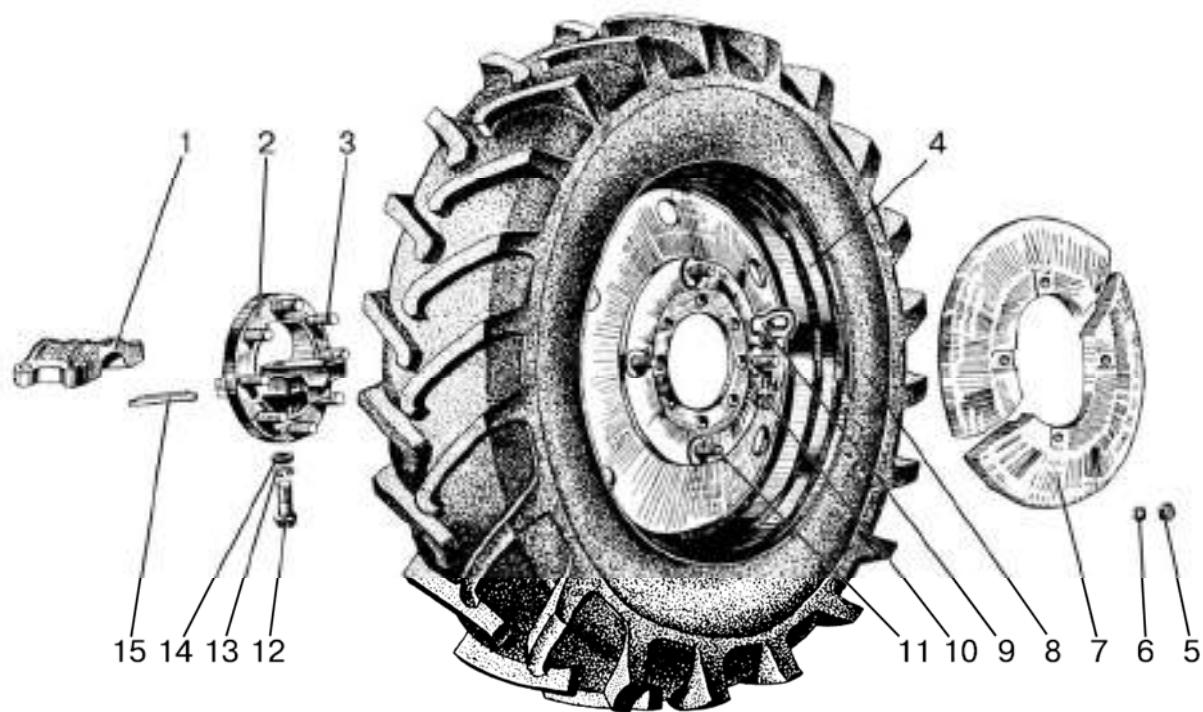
Rear driving wheels. Rear wheel hubs
